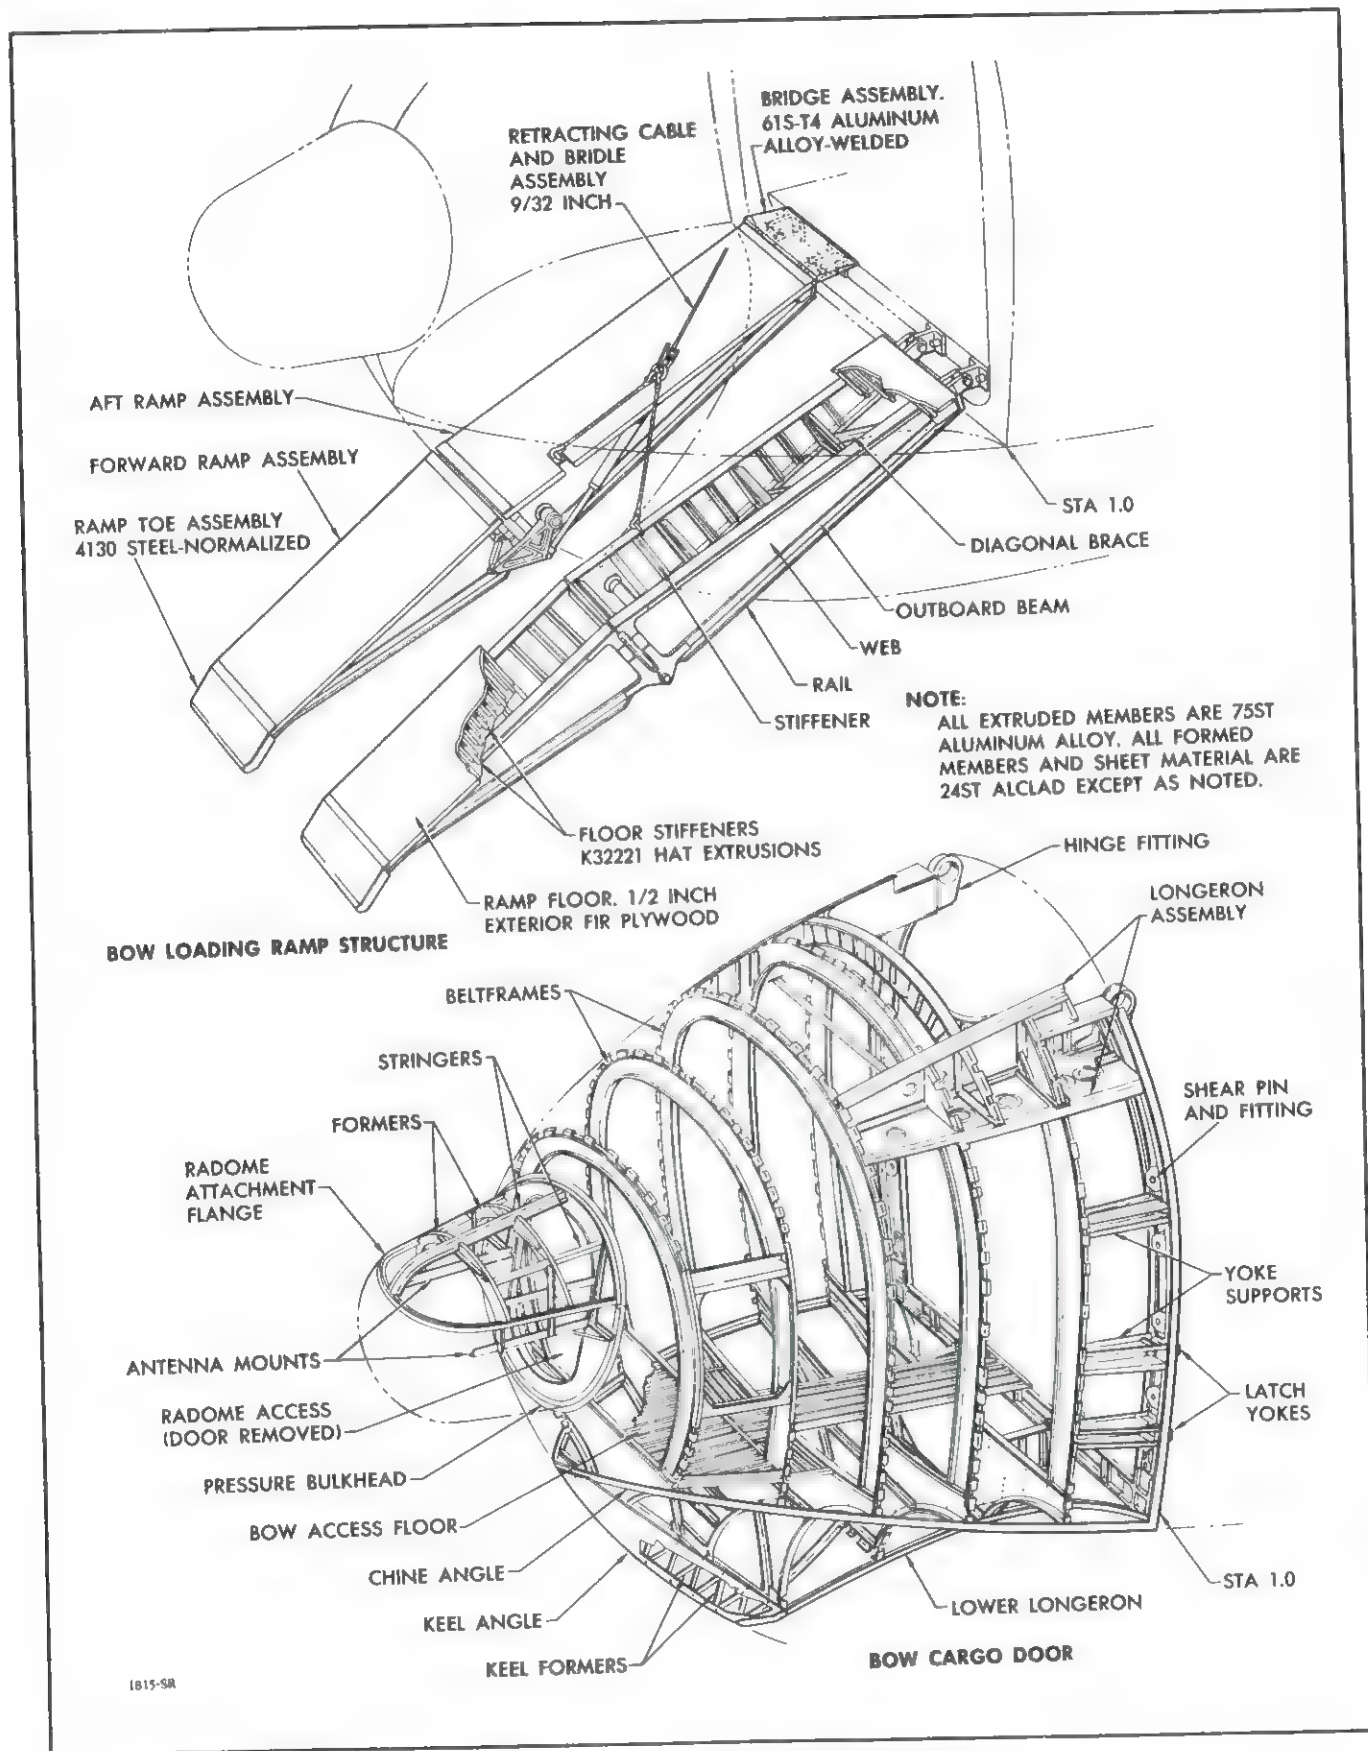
Bow Cargo Door and Loading Ramp Structure
